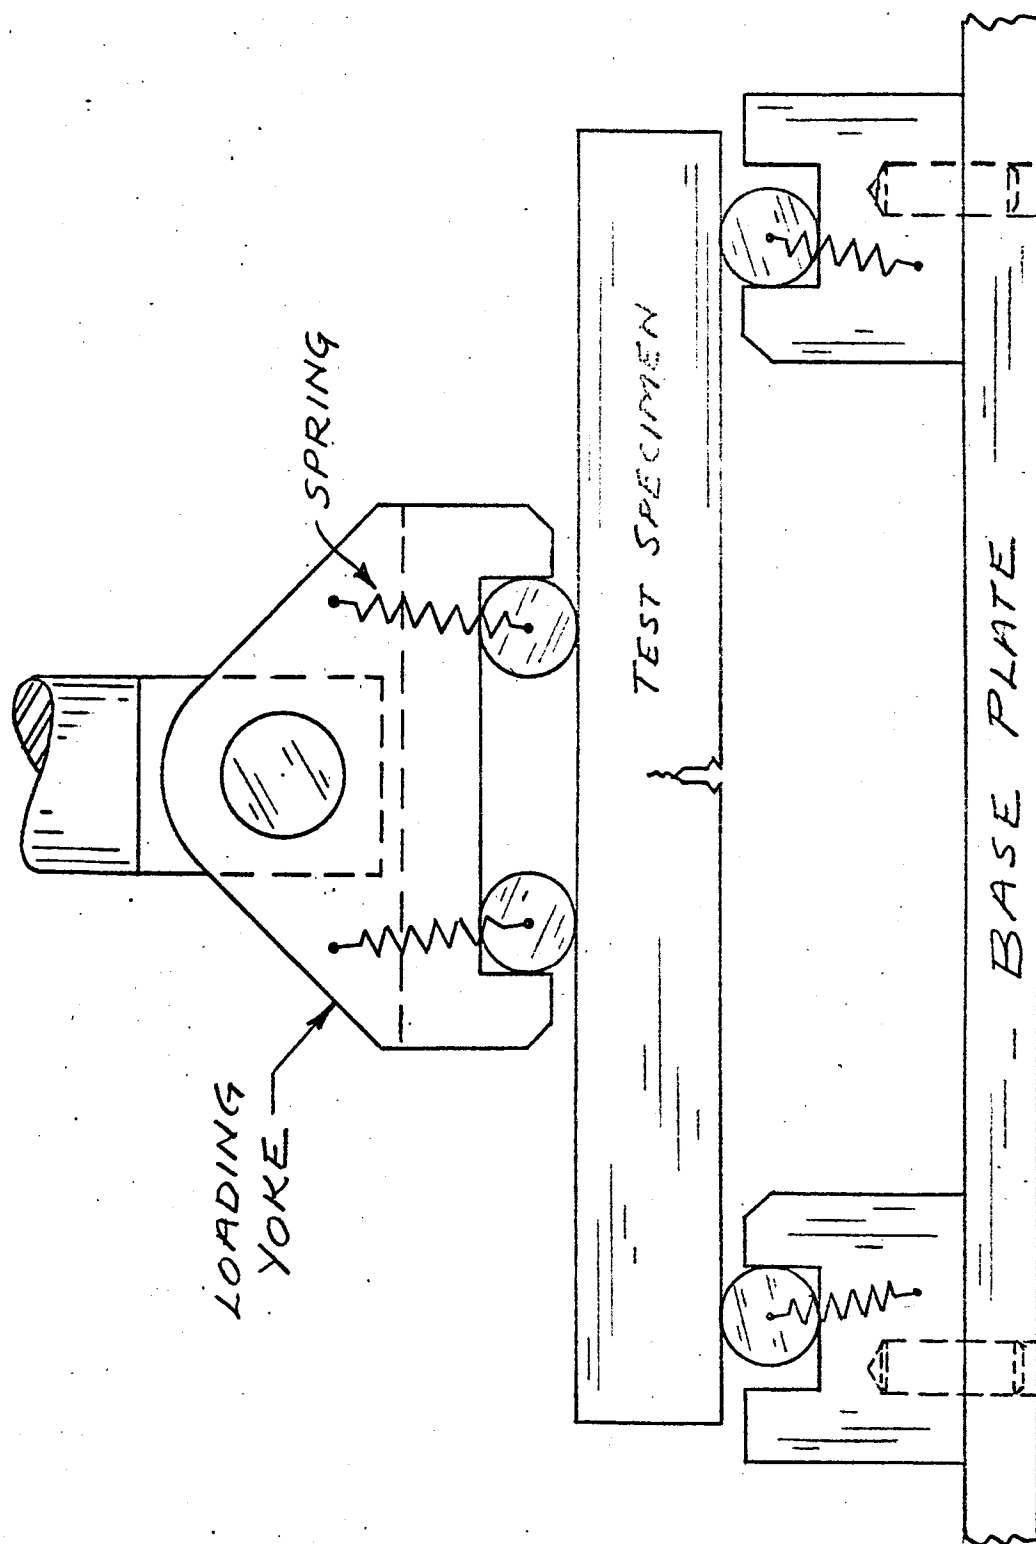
SUGGESTED DESIGN OF BEND FIXTURE PERMITTING PIN MOVEMENT.
